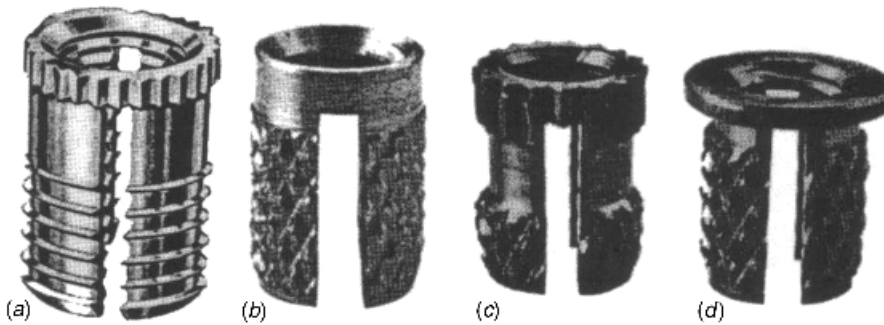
Metal expansion inserts: (a) vane design; (b) diamond knurl design; (c) straight-knurled design; (d) flange top. (From Ref. 18.)
